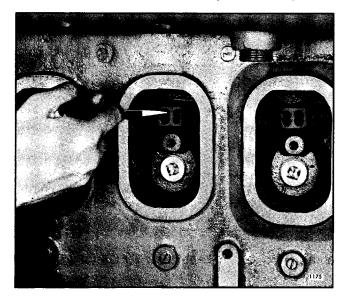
Inspecting for Broken Piston Rings Through Cylinder Liner Air Ports
